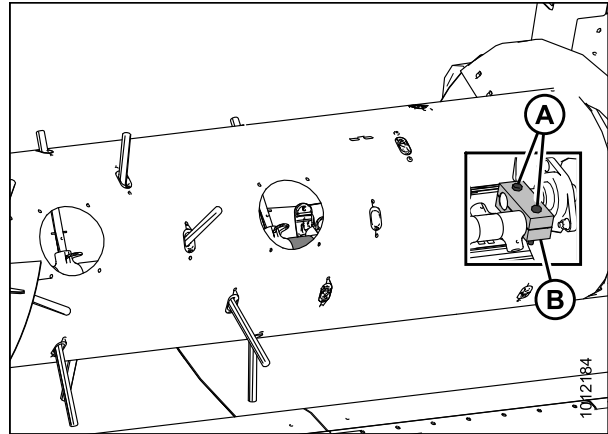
Left Side Finger Support Clamp (Cutaway View Shown)
